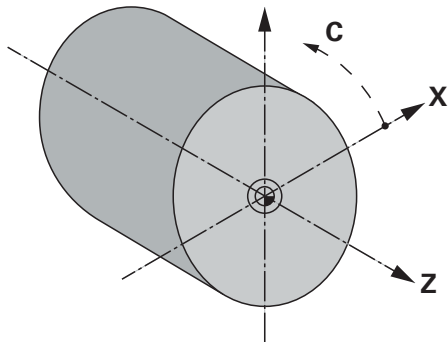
Assignment of the rectangular coordinate system to the workpiece
